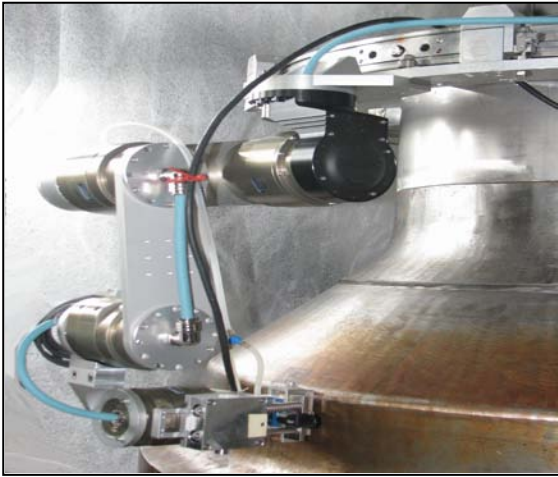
LIGHT-WEIGHT ROBOTIC ARM REPLACING SPECIFIC TRACK MANIPULATOR FOR HEAD WELDS AND LIGAMENT INSPECTION
